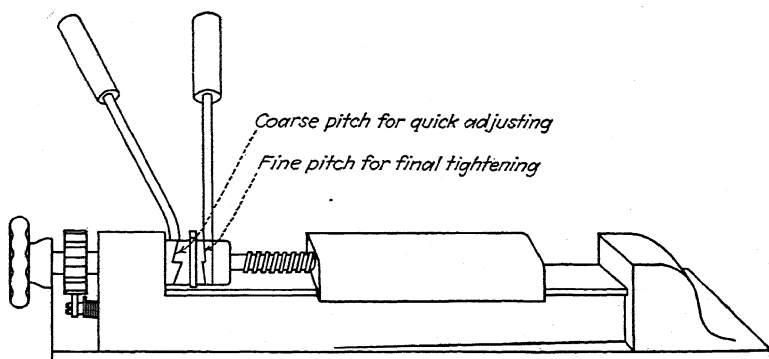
Machine vise tightened by cam-actuated mechanism.
